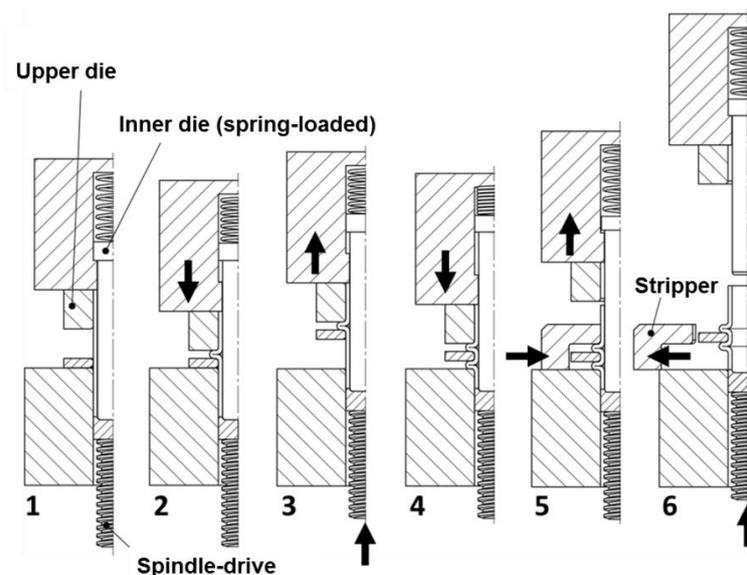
Upset bulging prototyping tool for manufacturing tests
